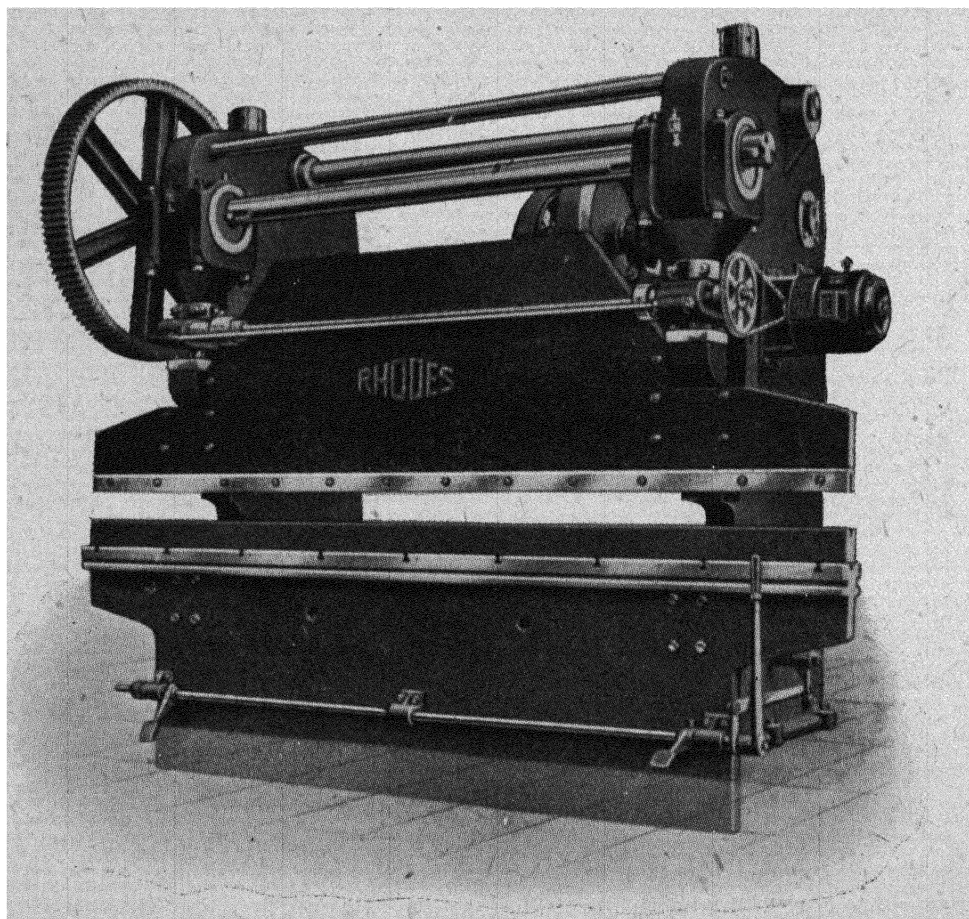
A BENDING PRESS—OR “BRAKE”—USED FOR FORMING BENDS IN THE MANUFACTURE OF AIRCRAFT, RAILWAY COACHES, AND SHEET-METAL FURNITURE
